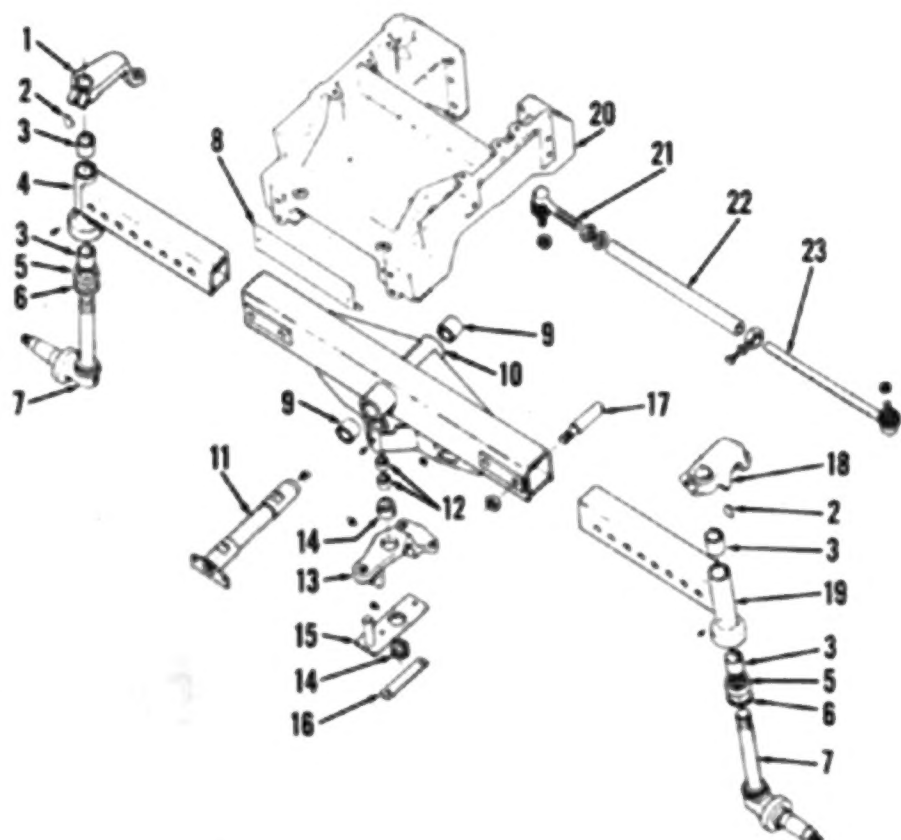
Exploded view of straight adjustable front axle assembly available on all models.
